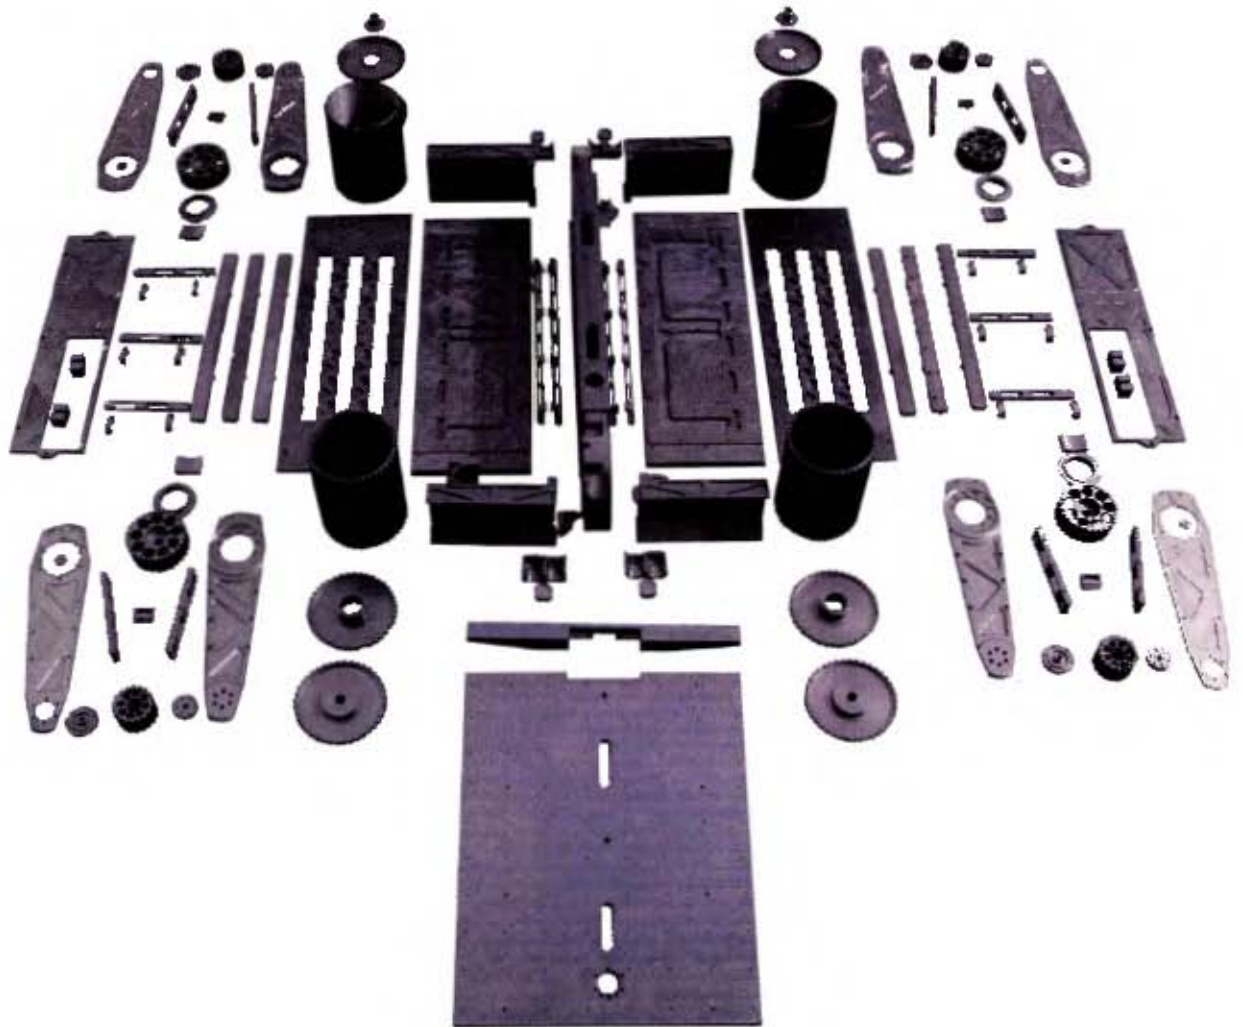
The machined aluminium parts making up the platform after anodising.
